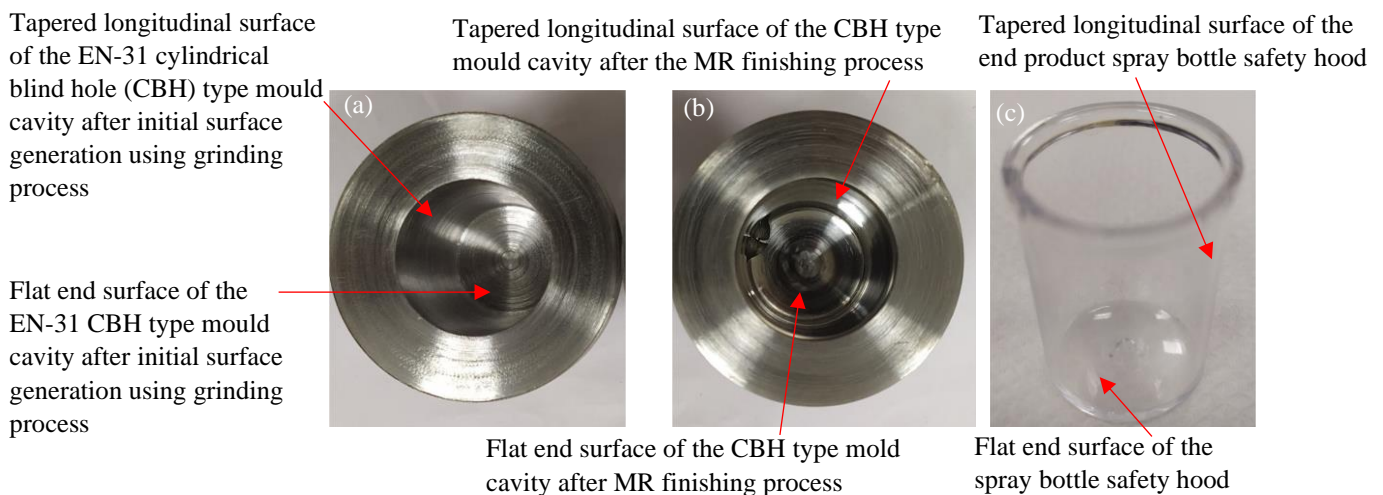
Photograph of the CBH type mould cavity (a) initially after grinding process, (b) after the present MR finishing process and (c) the final end product spray bottle safety hood.
